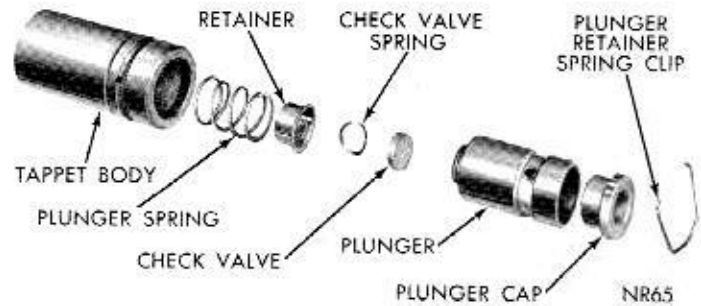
Hydraulic Tappet Assembly (Disassembled View)
